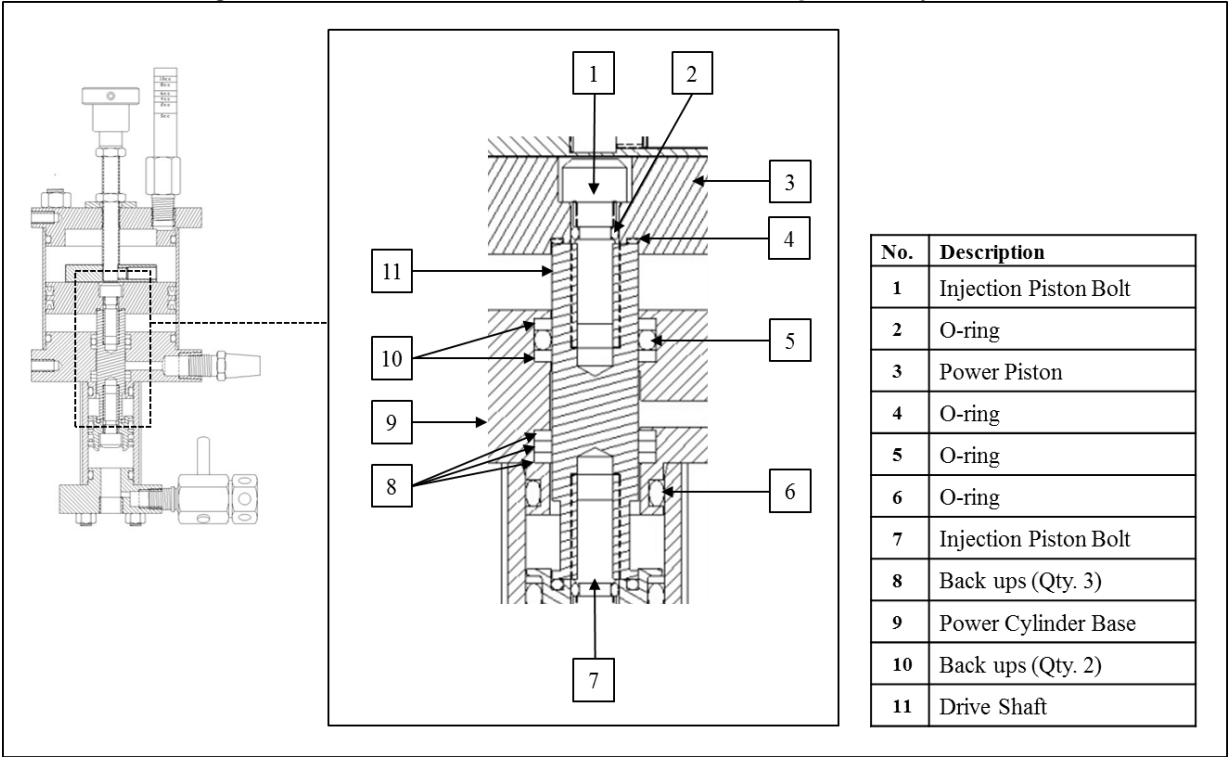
Drive Shaft Detail (Check Valves With Optional Adjustment)
